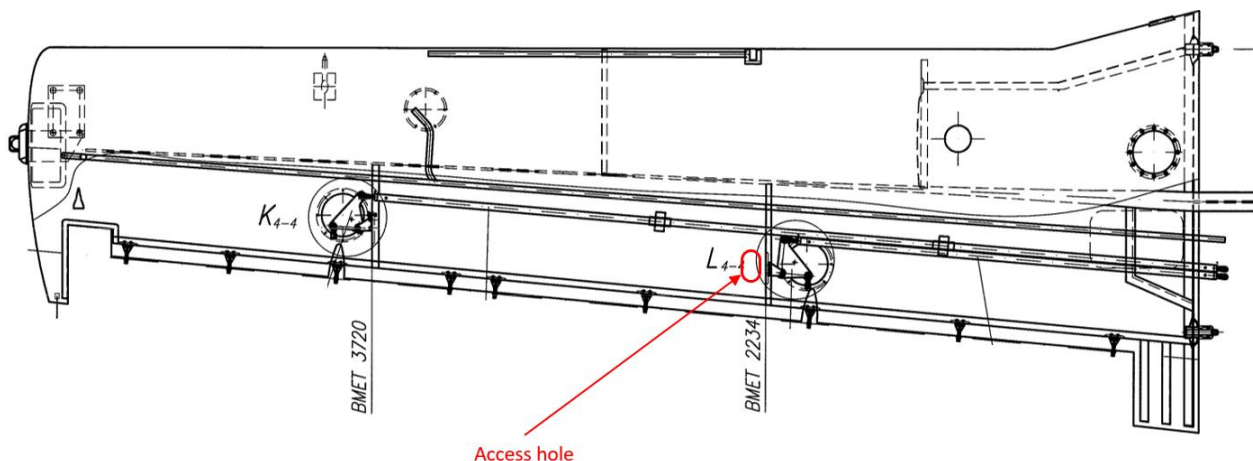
Access Hole Wing, Flap bell crank attachment bolts (LH shown, RH mirrored)
